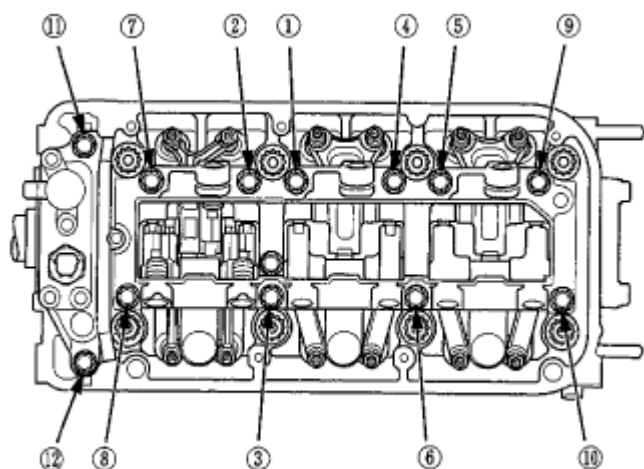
Identifying Mounting Bolts Tightening Sequence
